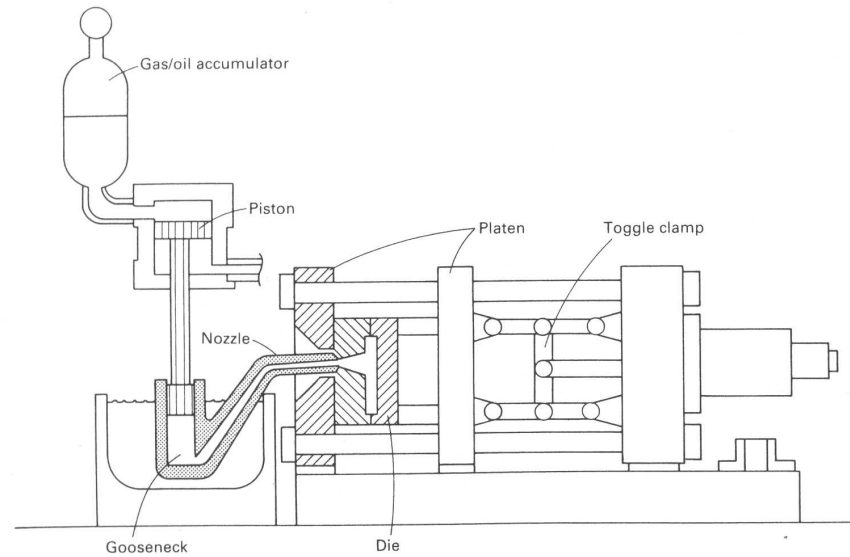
Schematic showing the principal components of a hot chamber die casting machine
